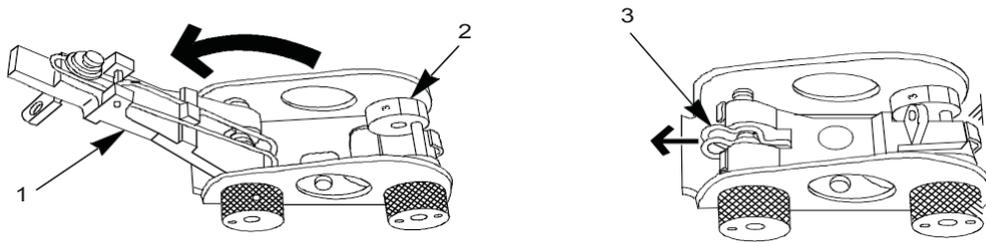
Lock Spring, Sight Leaf Assembly, Elevator Assembly.
